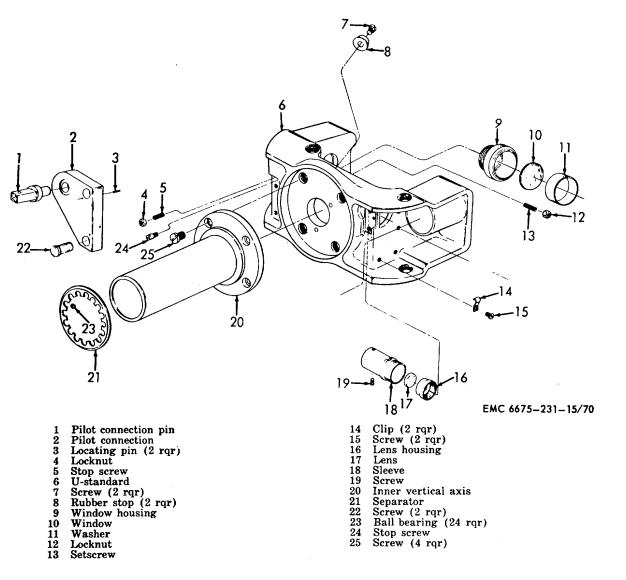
U-standard and inner vertical axis, removal, disassembly, reassembly, and installation.
